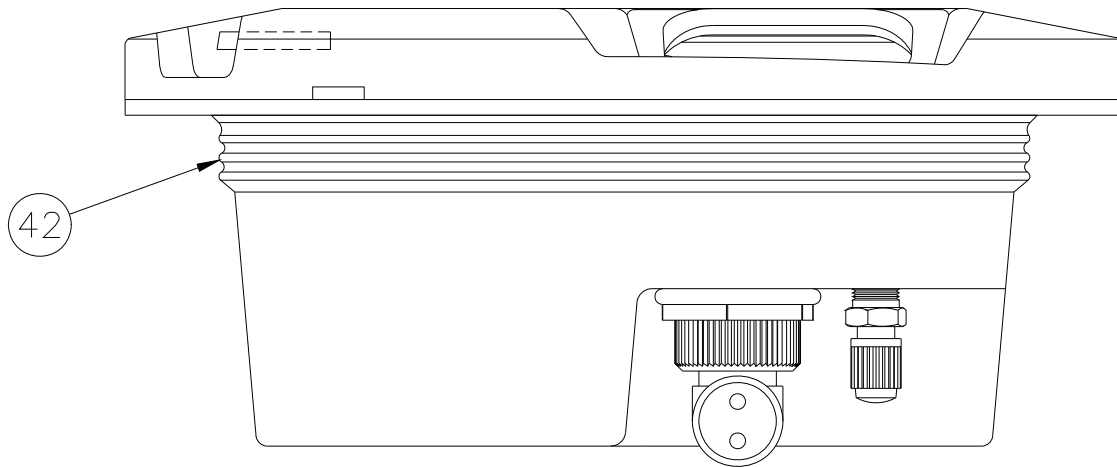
Side View of Fixture with Optional External Support Ring Gasket
